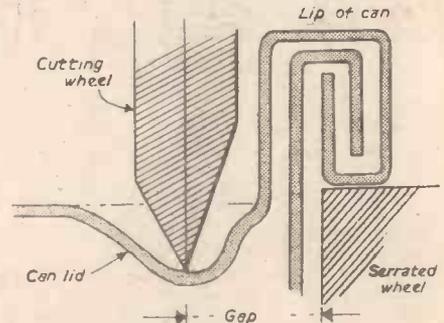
Enlargement of detail inside circle in Fig. 2. The gap between cutting wheel and serrated wheel is so wide that the can lid bends instead of shearing.
